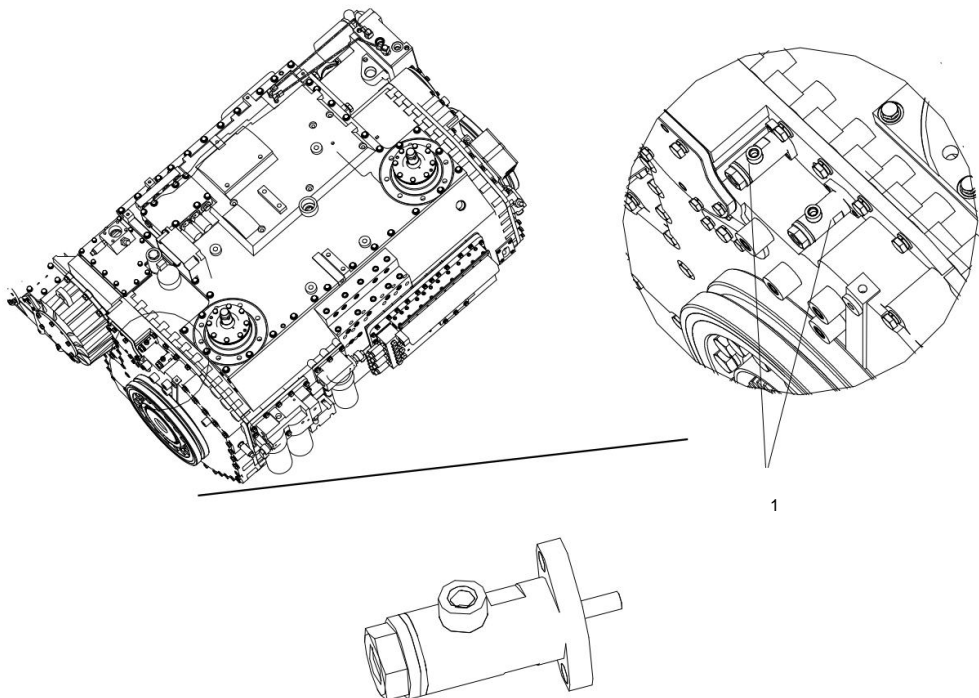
Installation location diagram of the servo hydraulic oil cylinder and picture.
